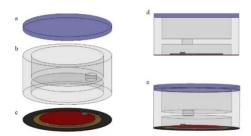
Design of the circular transducer-stack and housing components. (a) The cover to seal the transducer housing. (b) Main housing. (c) Piezoelectric with a single matching layer. (d) Side-view of the three parts assembled. (e) Assembly tilted at an angle for a 3D-impression
